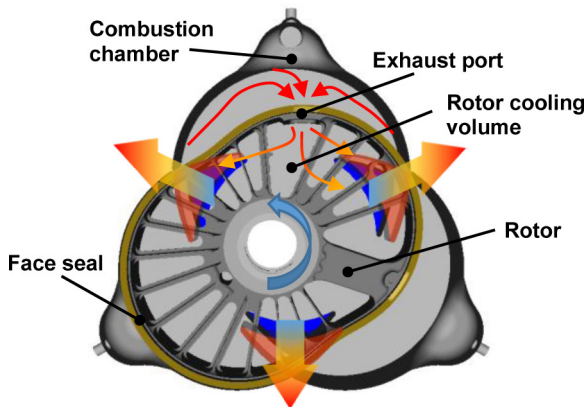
Exhaust gas and rotor cooling air flow inside the engine.
